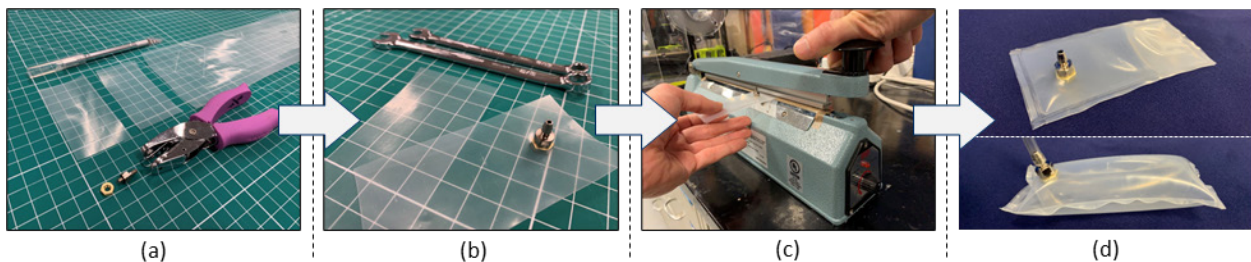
An example fabrication process of a proto-cell using a linear impulse sealing technique. (a) A large thermoplastic sheet is cut in two identically sized skin layers manually. (b) A barbed pneumatic fitting is attached to top skin layer near one of the edges with a rubber washer and a hex nut through a 1/8-inch punched hole. (c) All edges of two overlapping skin layers are heat sealed using linear impulse sealer, (d) producing a pneumatically operable airtight proto-cell.
